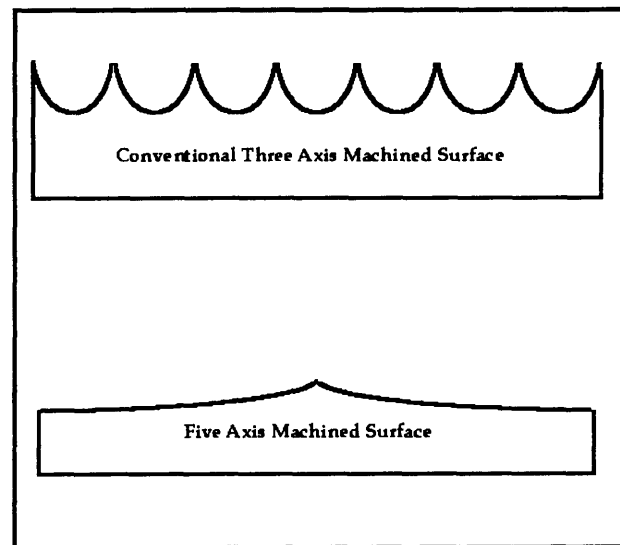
Difference between three and five axis machined surfaces in cross section.
